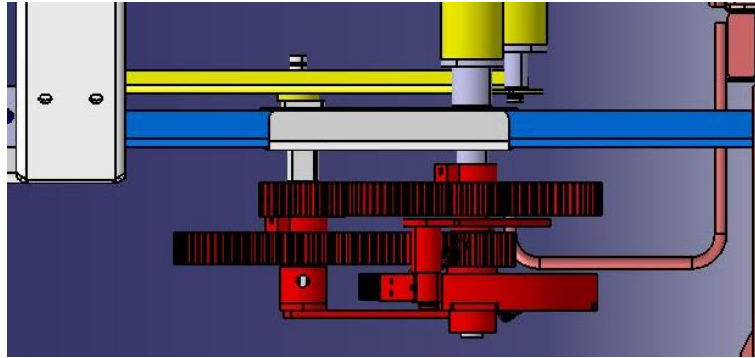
Top view of 5-wheel gear mechanism in beta model
